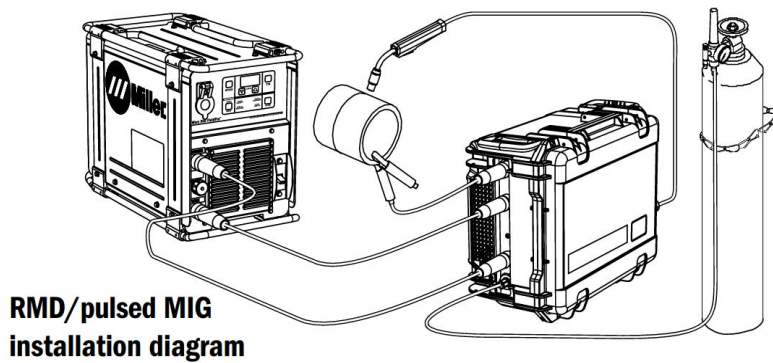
Welding system of RMD-GMAW(RMD-MIG)
